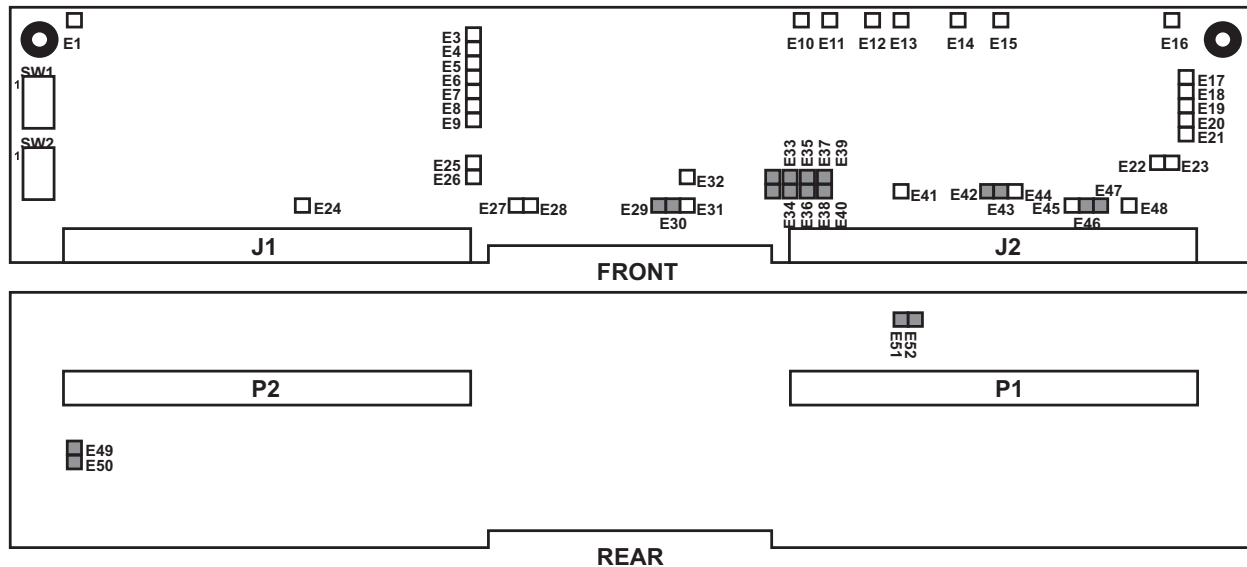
SR192A CPU Module Test Points, Jumpers and Switch Location
